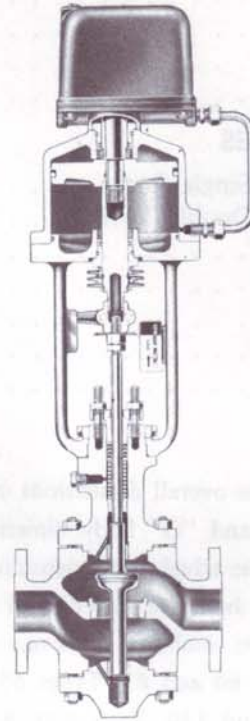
Type 470-A control valve with single port, top, and bottom guided Throttle Plug valve plug.
